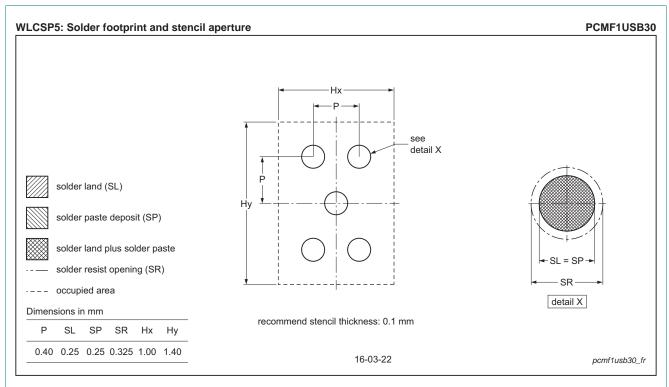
Soldering footprint WLCSP5 (PCMF1USB30)
